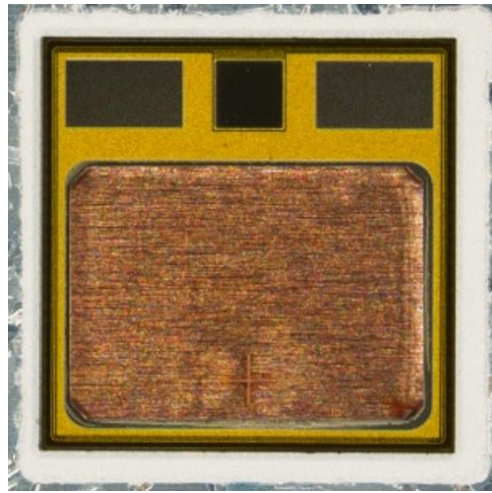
Sintered DTS[®] Open Tool with grey PAA residues close to laser cross.
